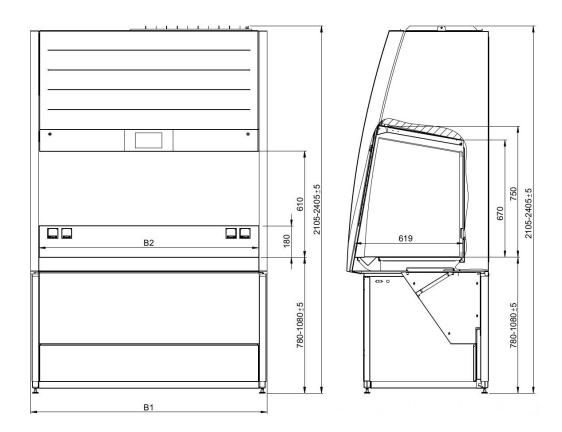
Design and dimensions of the safety cabinet in front and side view with electric base frame, example: claire® pure B/C-3-130 (B1 = width, outer dimensions; B2 = width of working access opening, depending on model size, see table of technical data)
